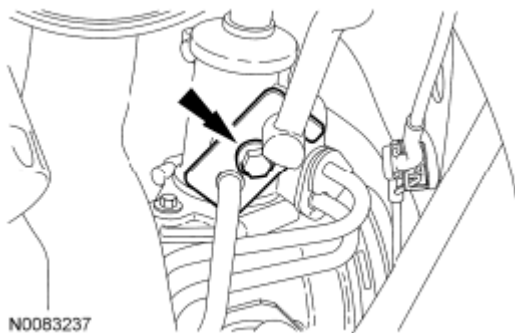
Locating Power Steering Fluid Tubes Bolt
